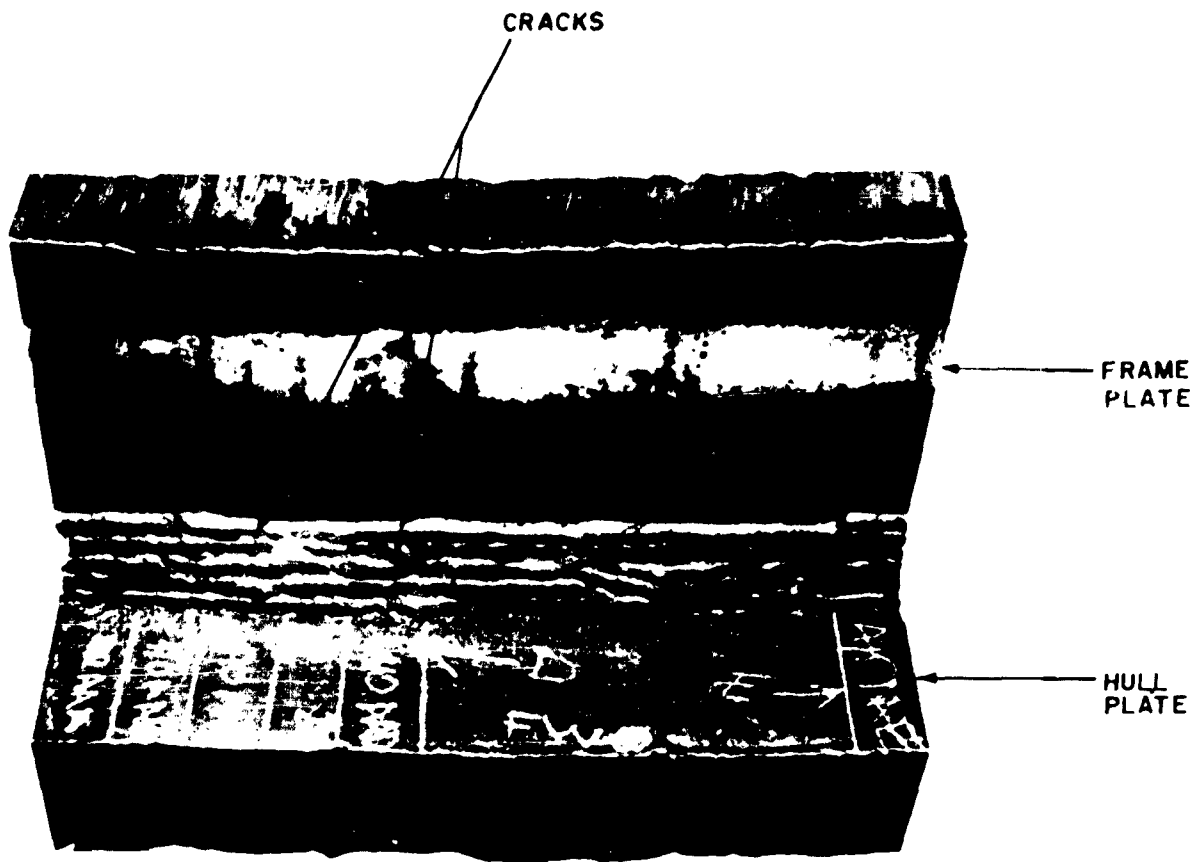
Sample of frame-to-hull tee-joint removed from the pressure hull of a submarine. View shows side of joint where cracks were observed.
